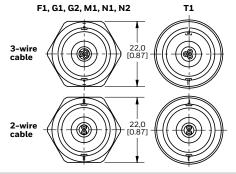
DIN Mounting Dimensions (For reference only. mm/[in].)
